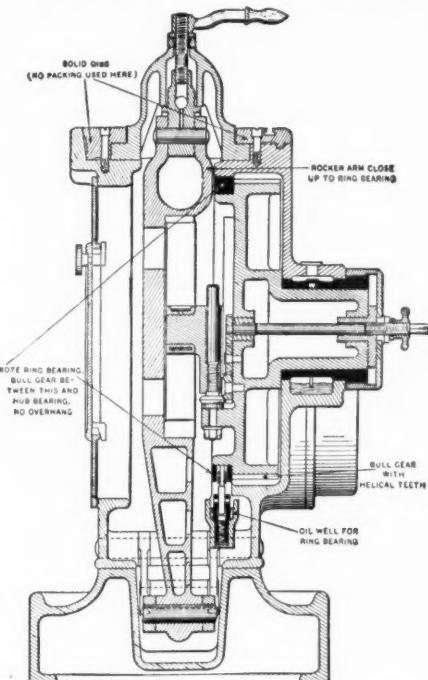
A shaper bull gear, showing details of the automatic lubricating system. Essential parts are noted on the sketch.
